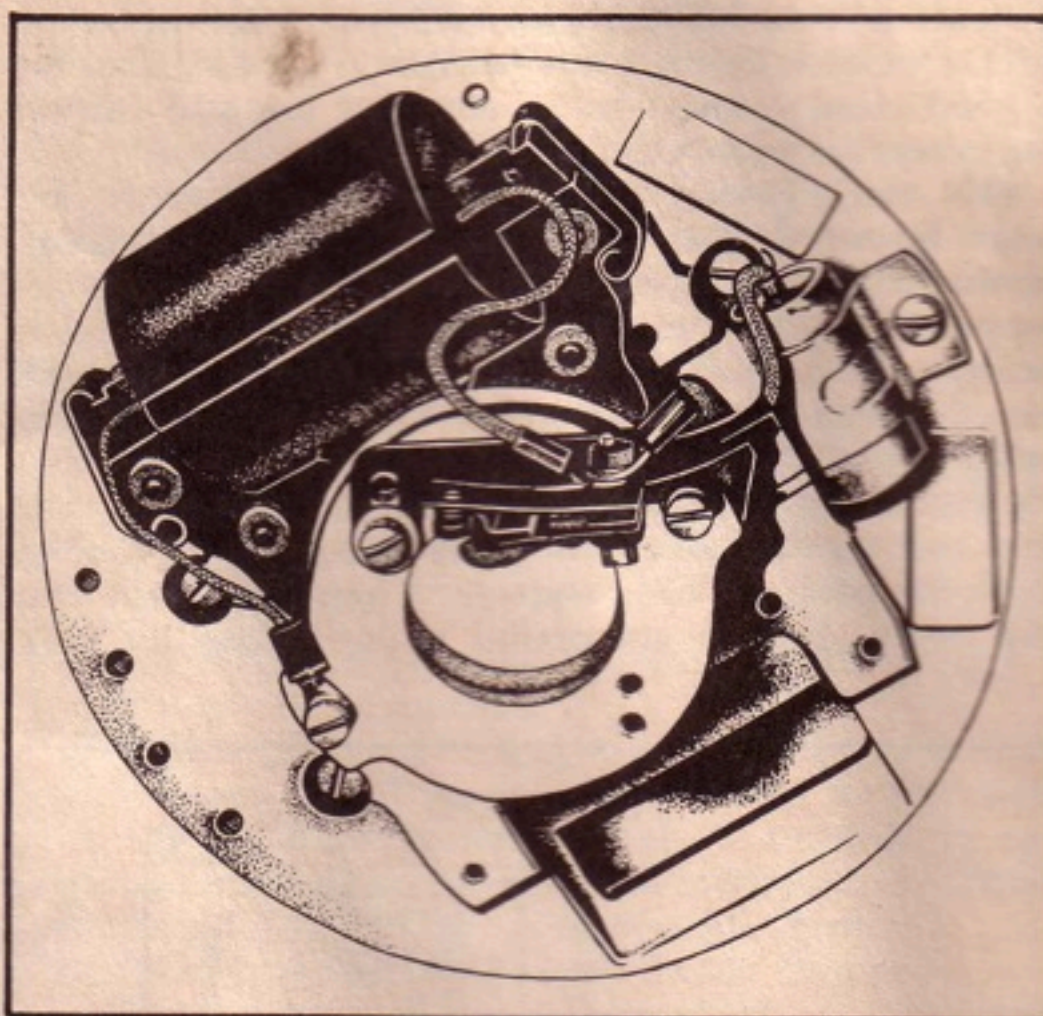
Bearing Plate With Scintilla Magneto Parts Attached
